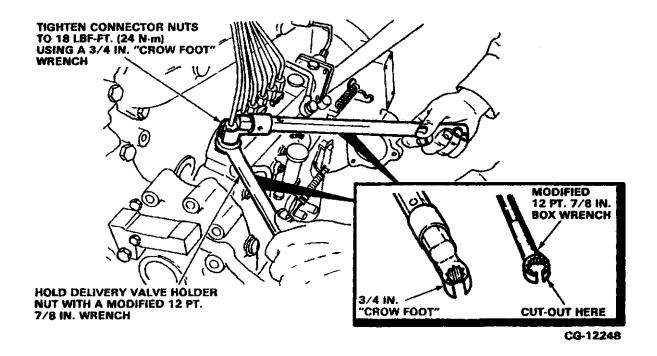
Install Injection Line Connector Nuts to the Pump Delivery Valve Holders
